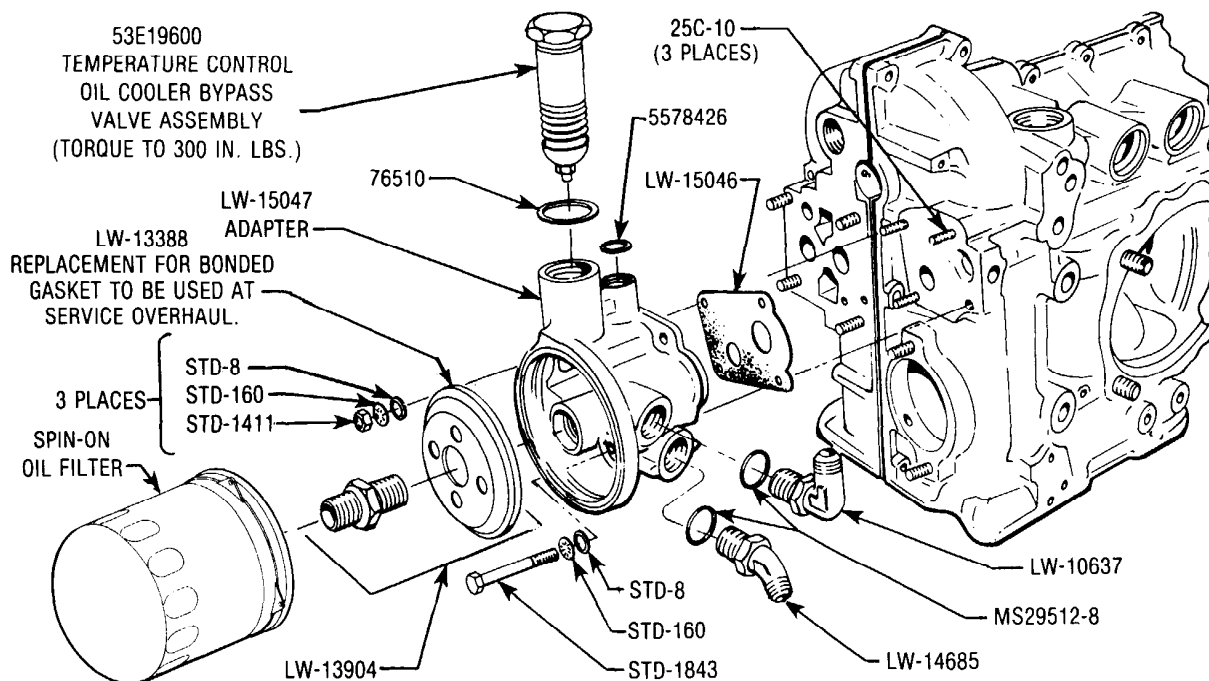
Exploded View of Full-Flow Oil Filter Assembly - 76 Series
